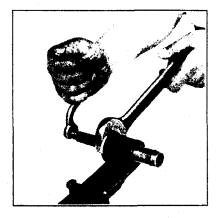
Installing Spring Eye Bushing with Puller 72355
